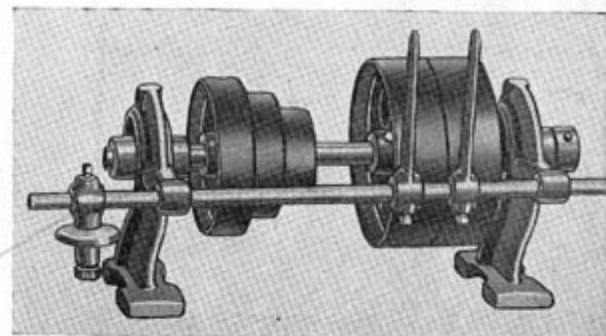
STANDARD COUNTERSHAFT FOR LINE SHAFT DRIVE.
